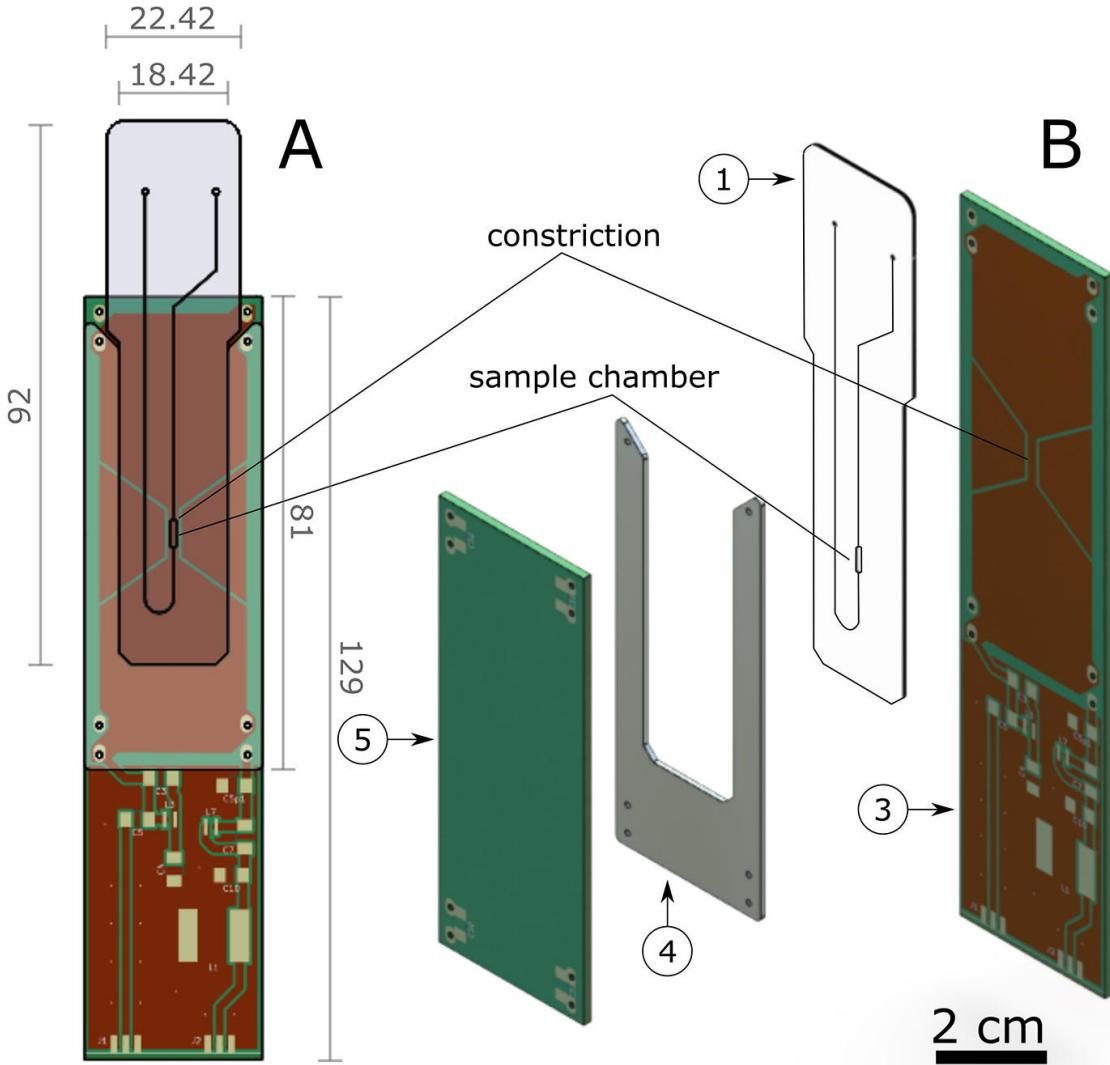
Drawings of the detector assembly and the microfluidic device (1). A: front view (dimensions in mm); B: exploded view. Spacer (4) ensures the alignment of the sample chamber with the constrictions on the PCB planes. In A, PCB plane 5 is hidden to show the orientation of 1 with respect to PCB plane 3. Thickness of each of the PCB planes is 1.52 mm and the copper layers on the PCBs is 35 μ m. Both the microfluidic device and the spacer are made from PMMA and have thickness of 0.9 mm and 1 mm respectively. Figure reproduced from [91]
